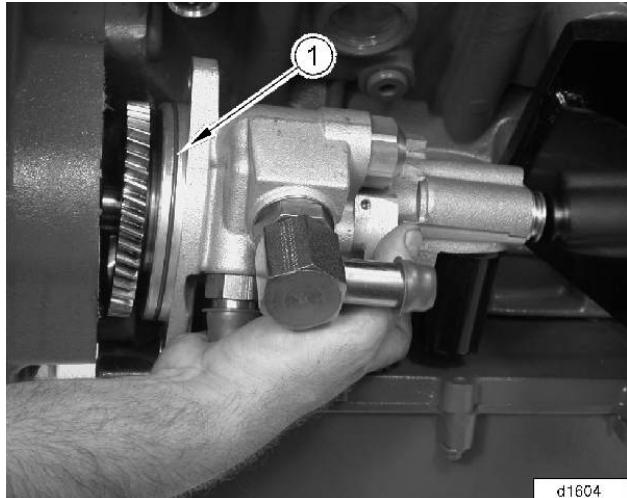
Lubricate O-ring and Install Power Steering and Fuel Pump Assembly
